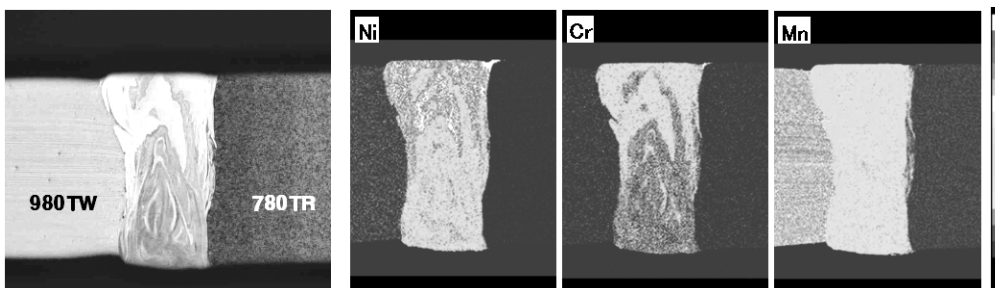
EPMA results of the weld metal of laser welded 980TW/780TR joint using Y309L filler wire
